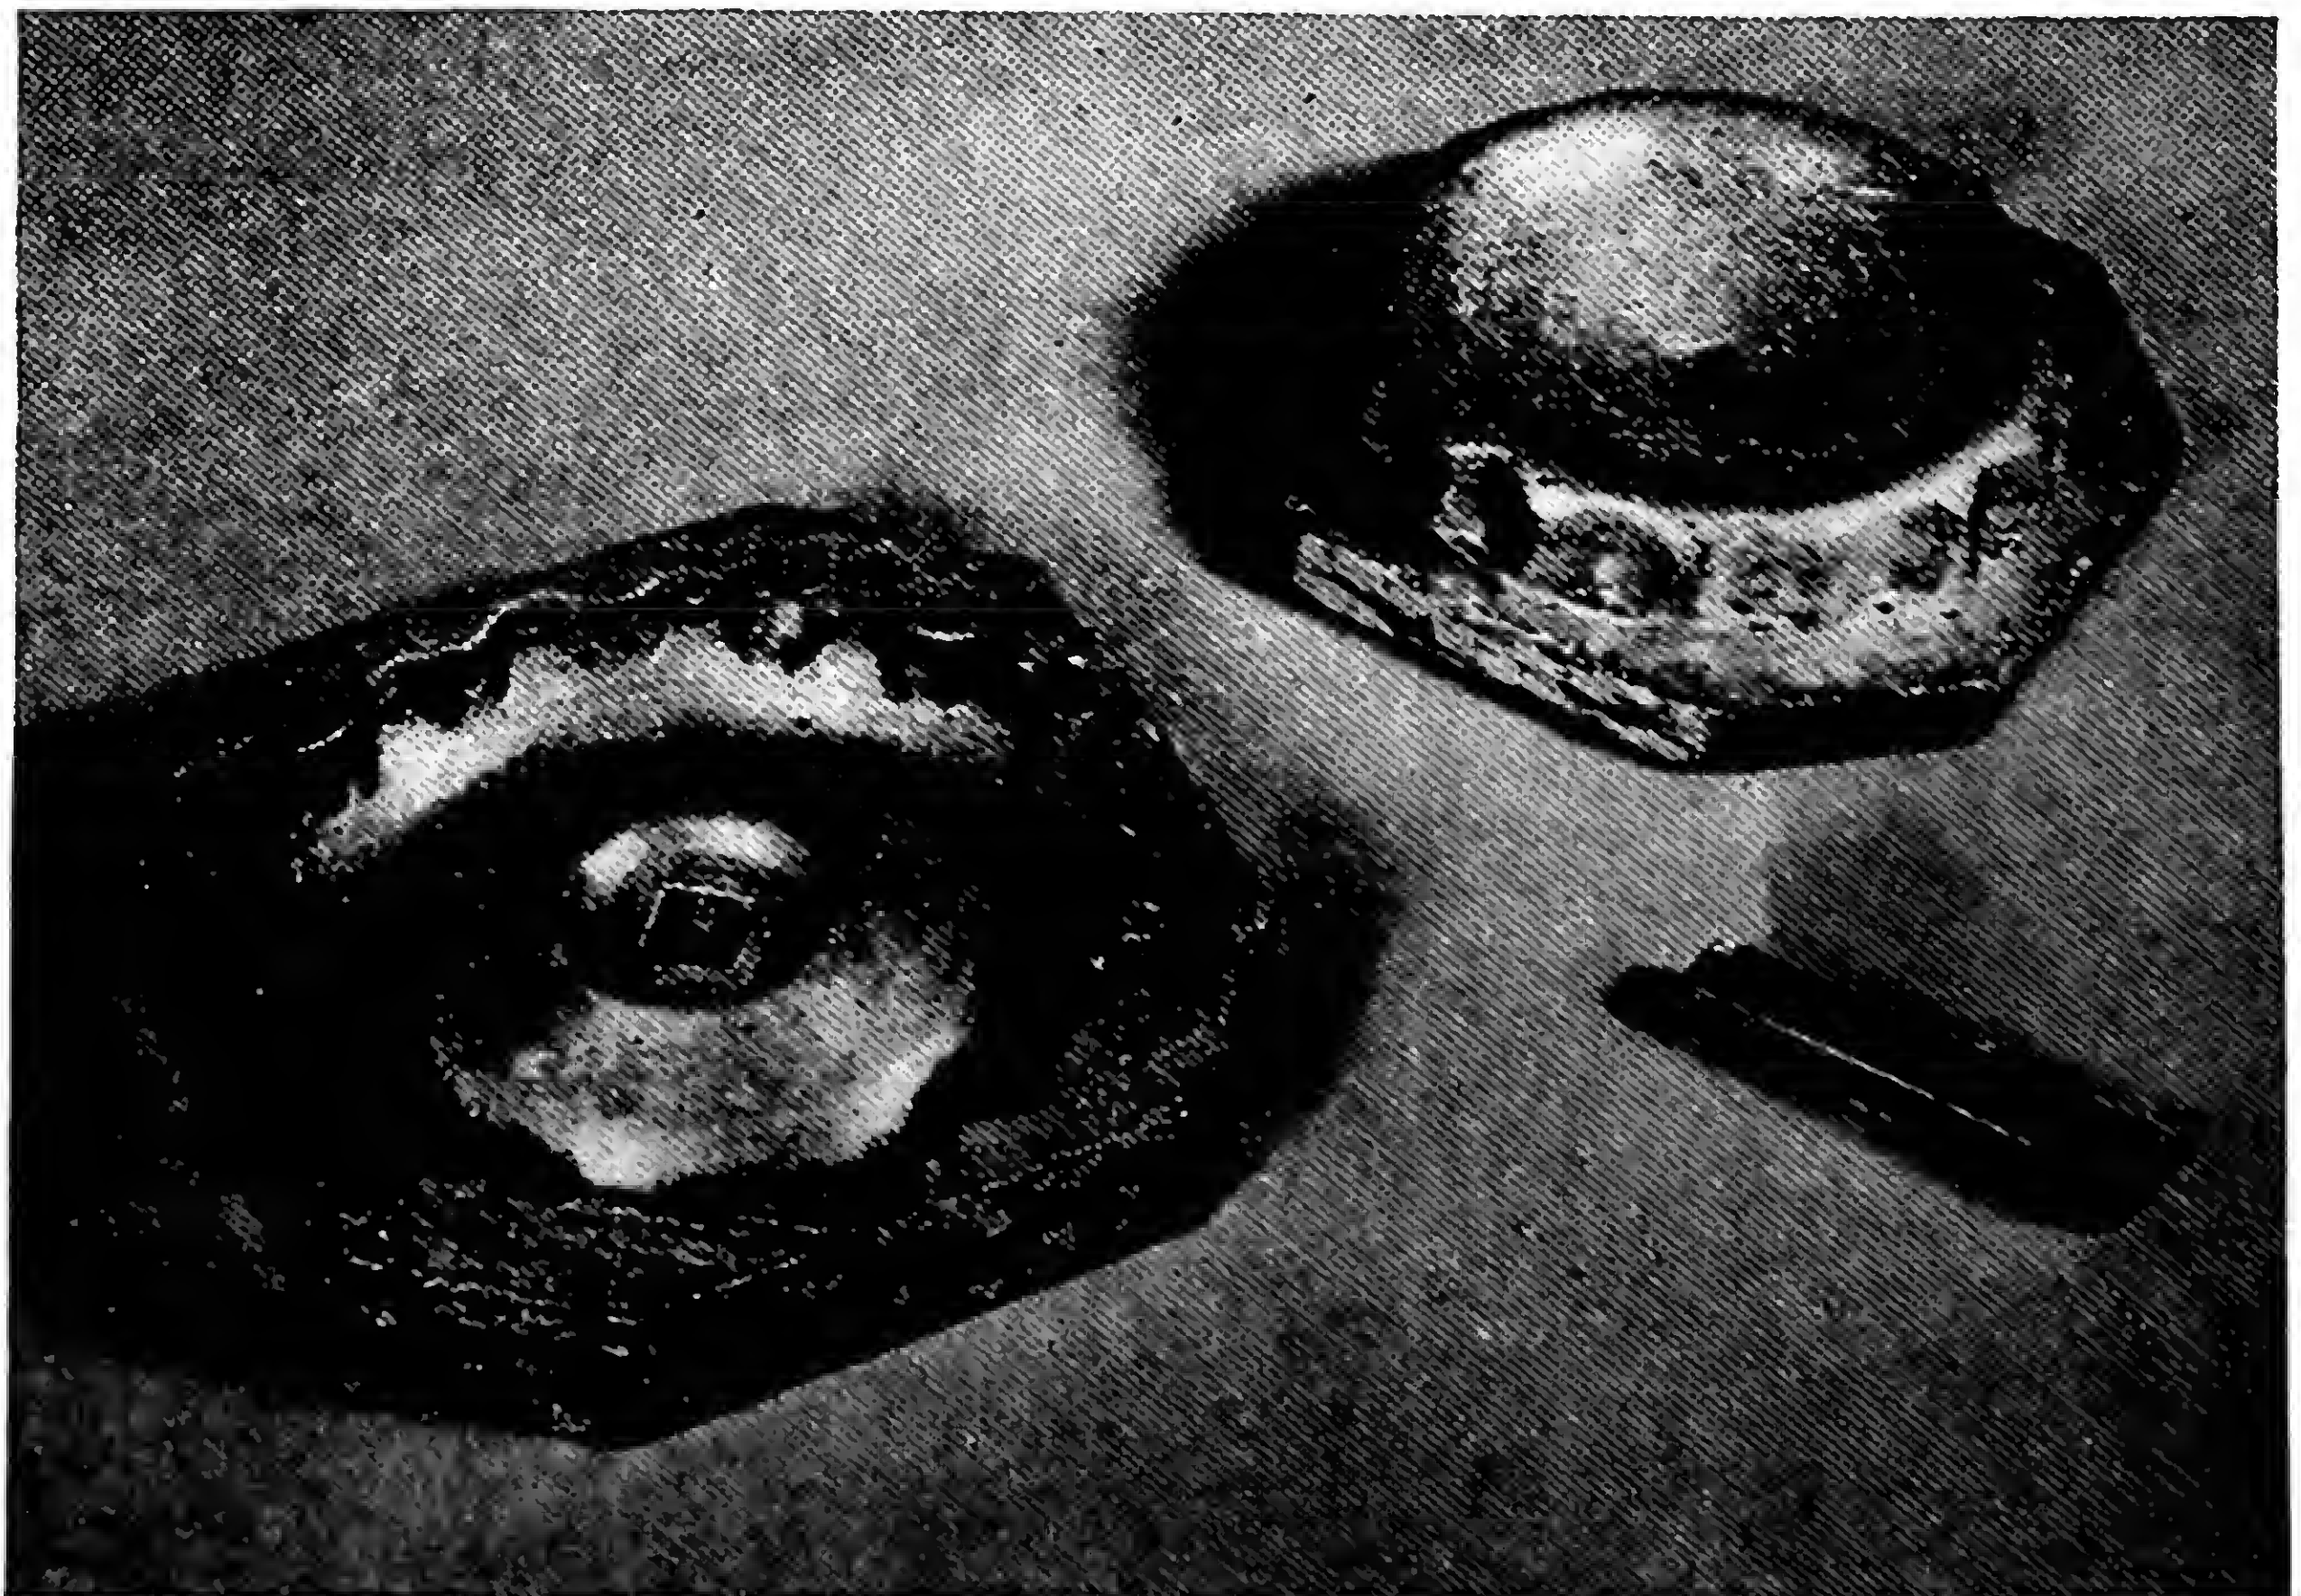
Cast aluminum mold, male and female dies, and knock-out pin. To be used for laminating a valve handle.
